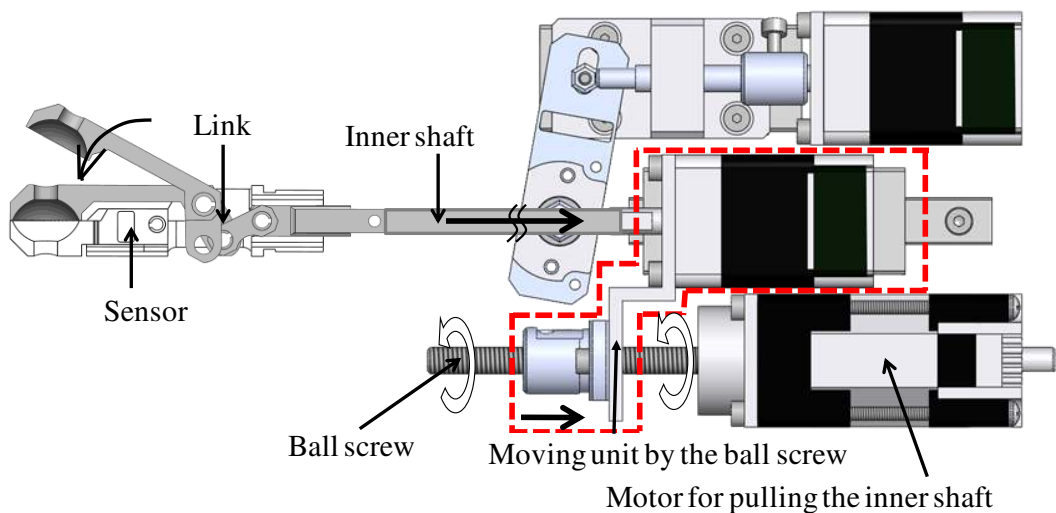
Closing the gripper by pulling the inner shaft using a ball screw
